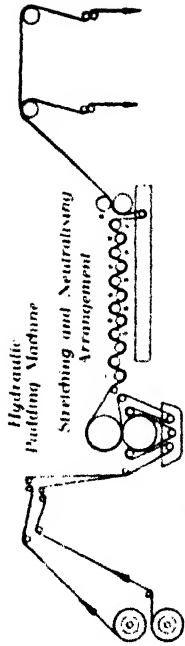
Descriptive drawings of chainless mercerising machines.
